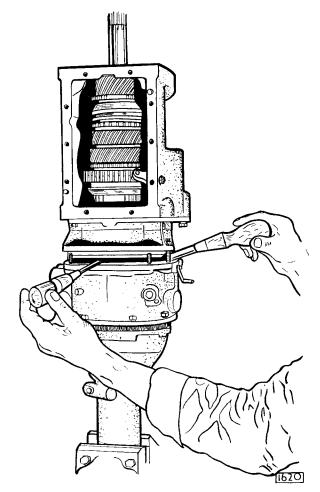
When fitting the overdrive to the gearbox, compress the oil pump plunger and align the operating cam with the plunger roller.
